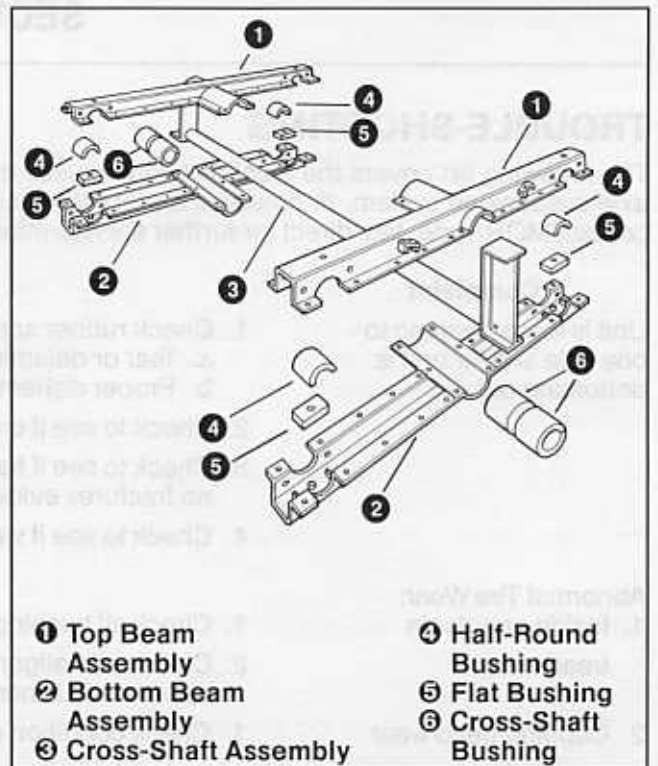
LITE/ryde Beam, Cross-Shaft and Bushing Assemblies
